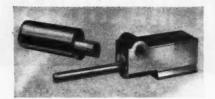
Internal Comparator Attachment for Use with External Comparator Shown in Fig. 1
